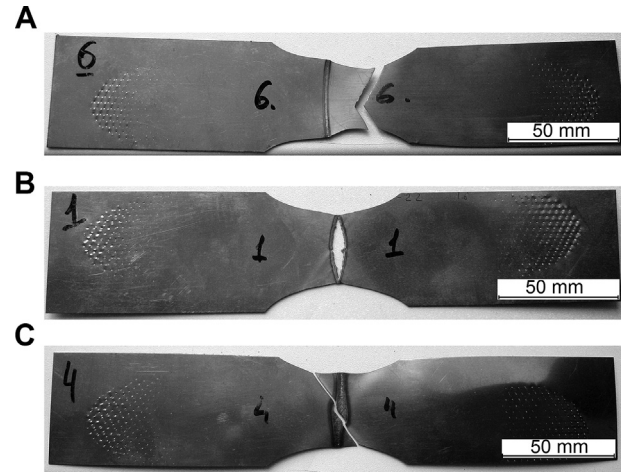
Types of welded joints failure: a – through the base metal (mode 6), b – along the axis of the weld (mode 1), c – through the weld and the base metal (mode 4).
